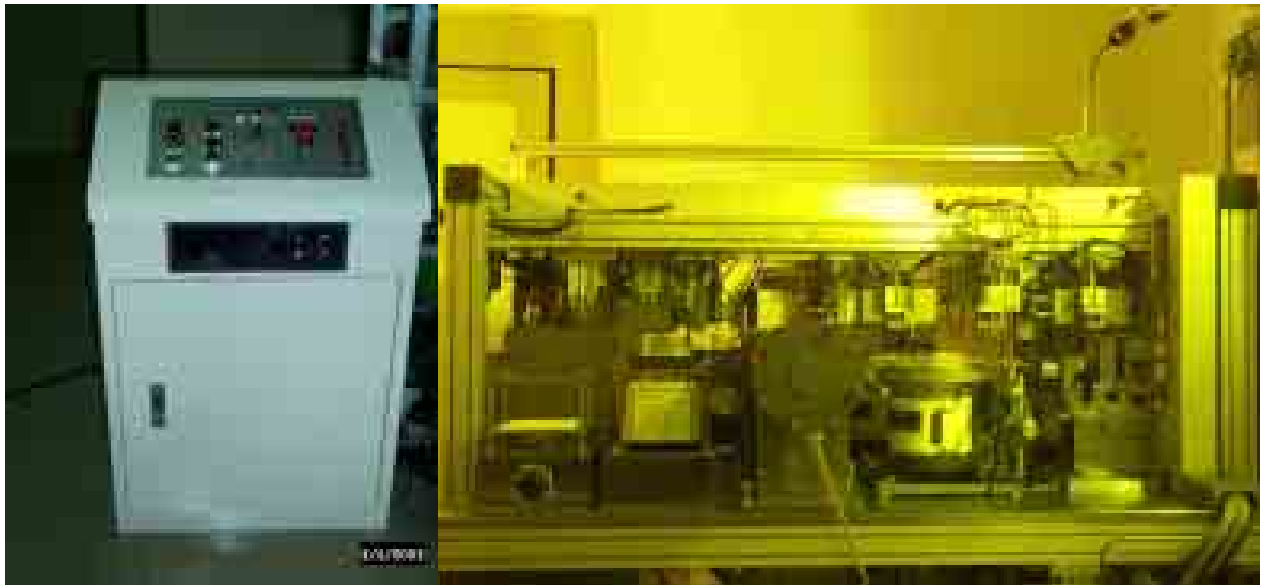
Welding machine for  $^{192}\text{Ir}$  sealed source production
